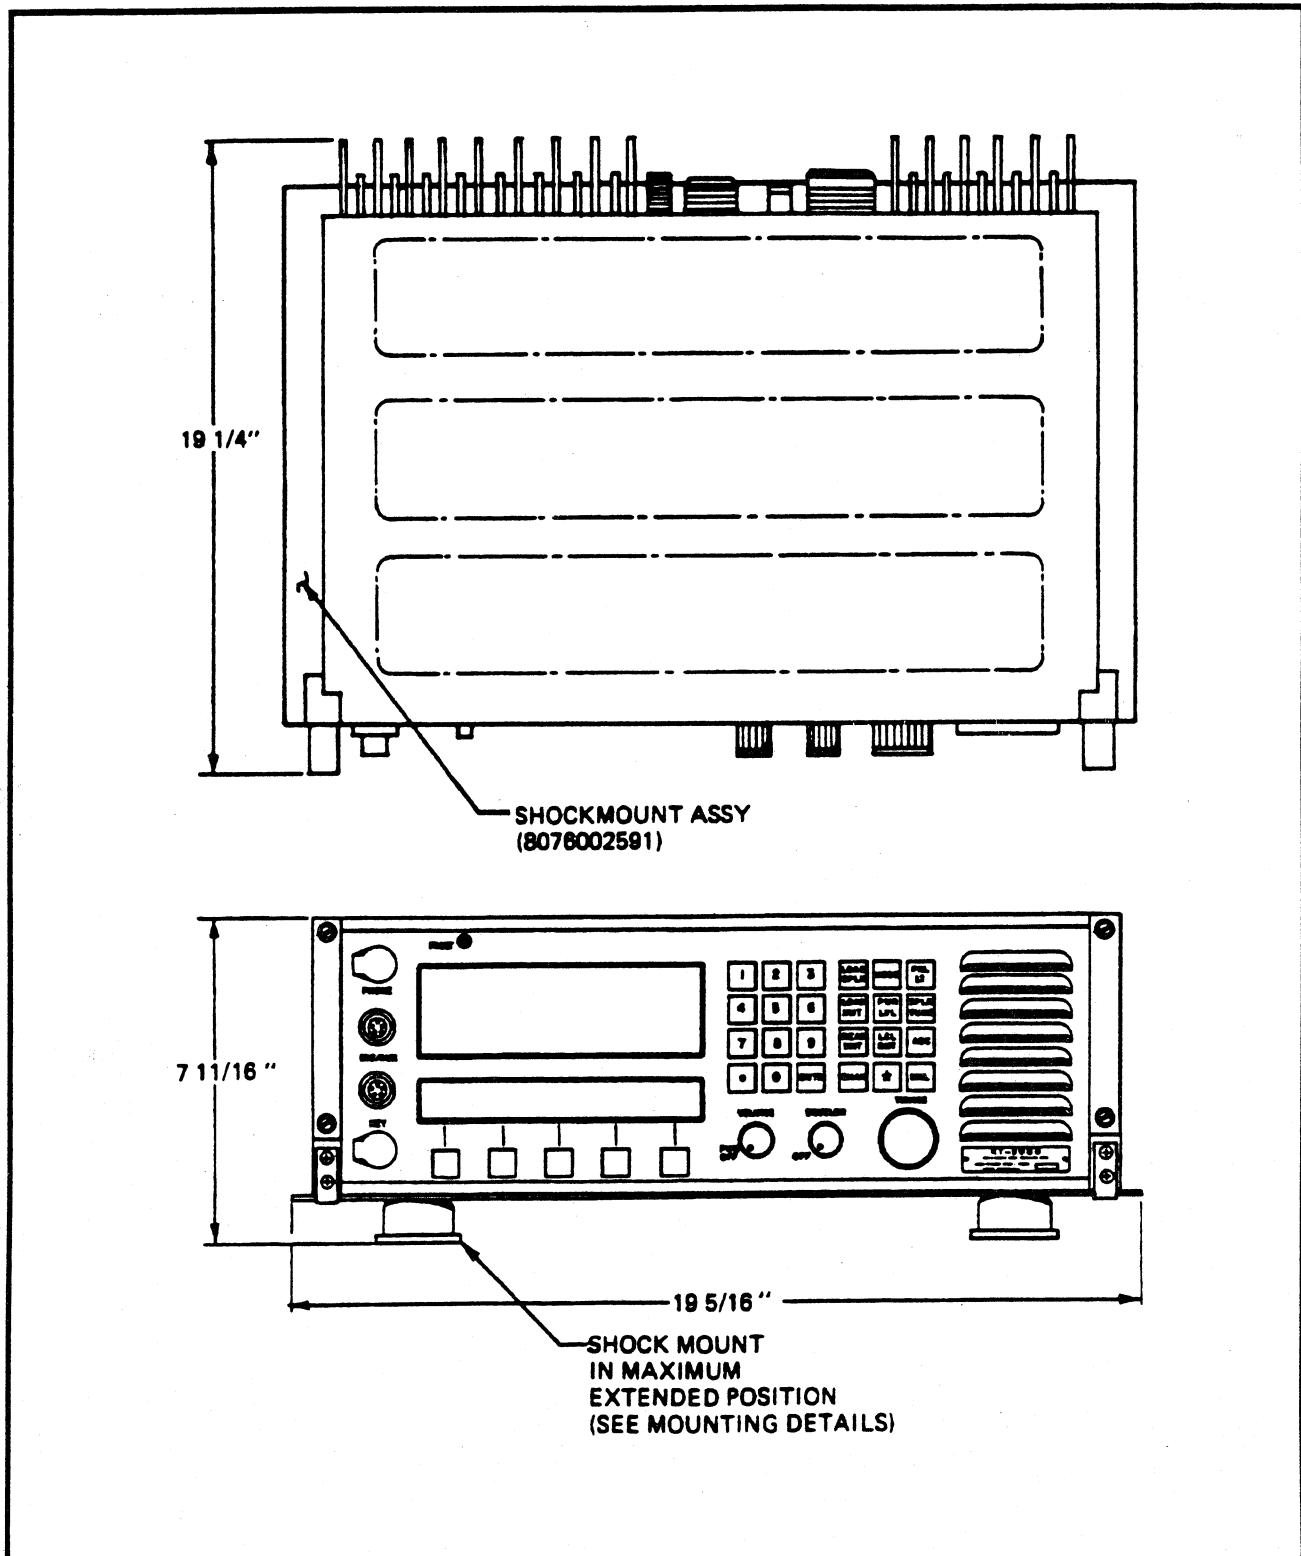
Outline Dimensions of RT-9000 with Shockmount.
